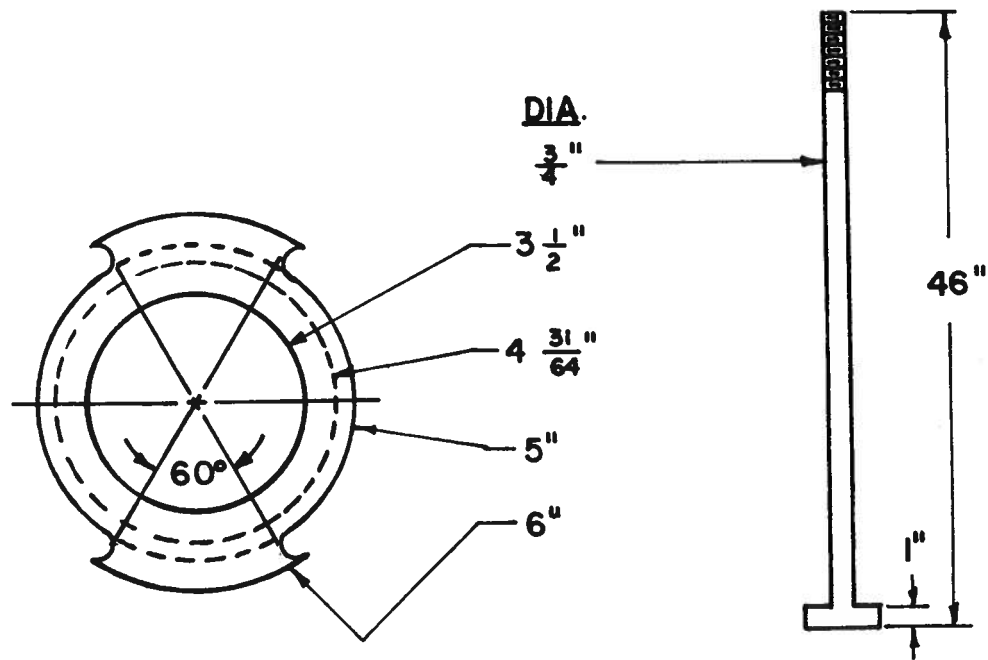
d DETAILS OF UPPER HOLDING RING AND RESTRAINING RODS OF CASTING MOLD
